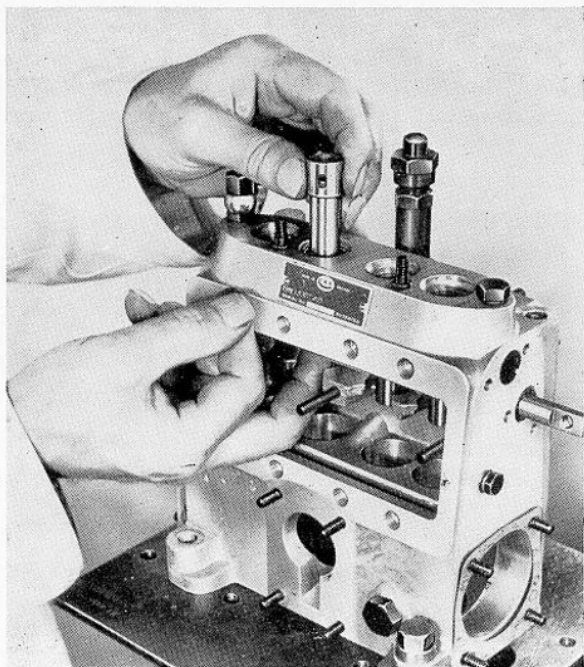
LIFTING OUT THE ELEMENT BARRELS—TYPICAL ILLUSTRATION
